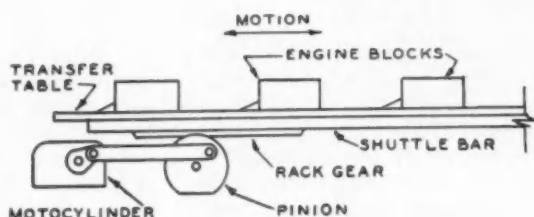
Example of a typical shuttle-type transfer machine. Here the transfer mechanism pushes engine blocks between broaching operations.
